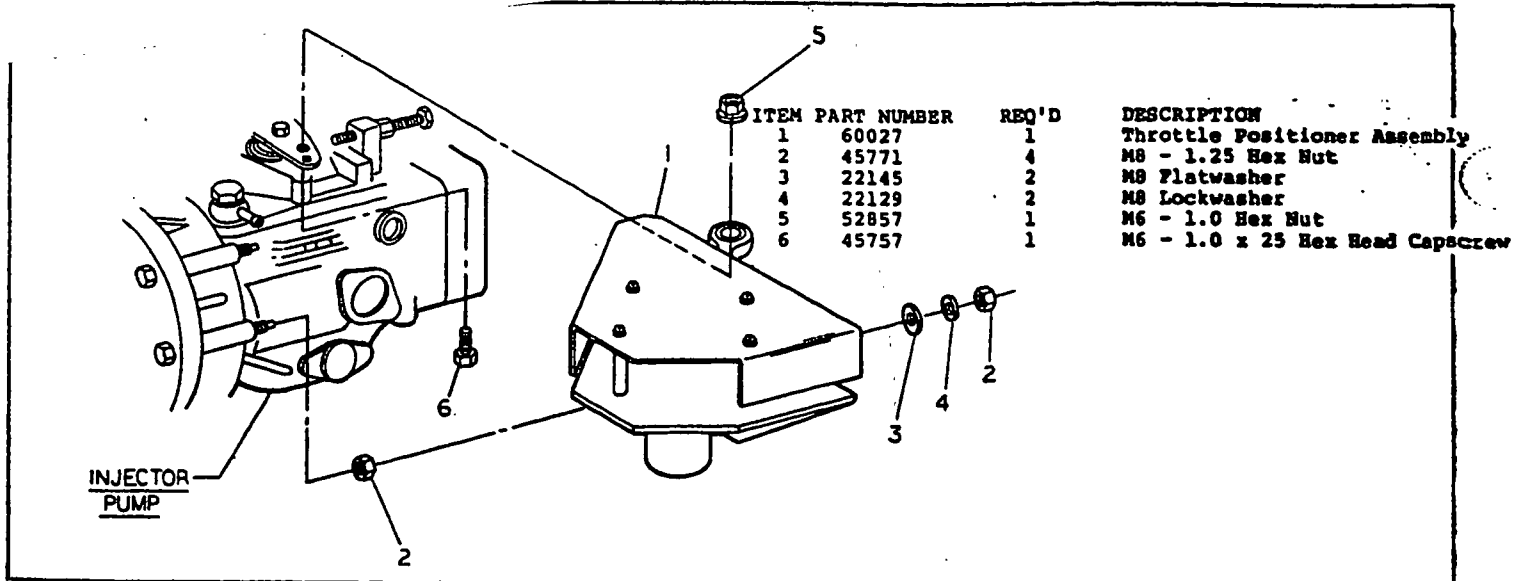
B. Exploded View of Throttle Positioner 3.0 Liter Units
